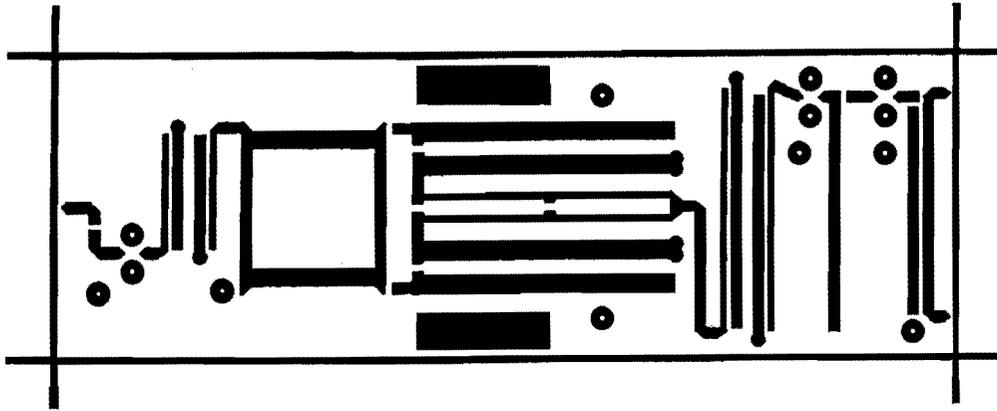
2304 MHz TX mixer PCB (0.8 mm double-sided FR4).
